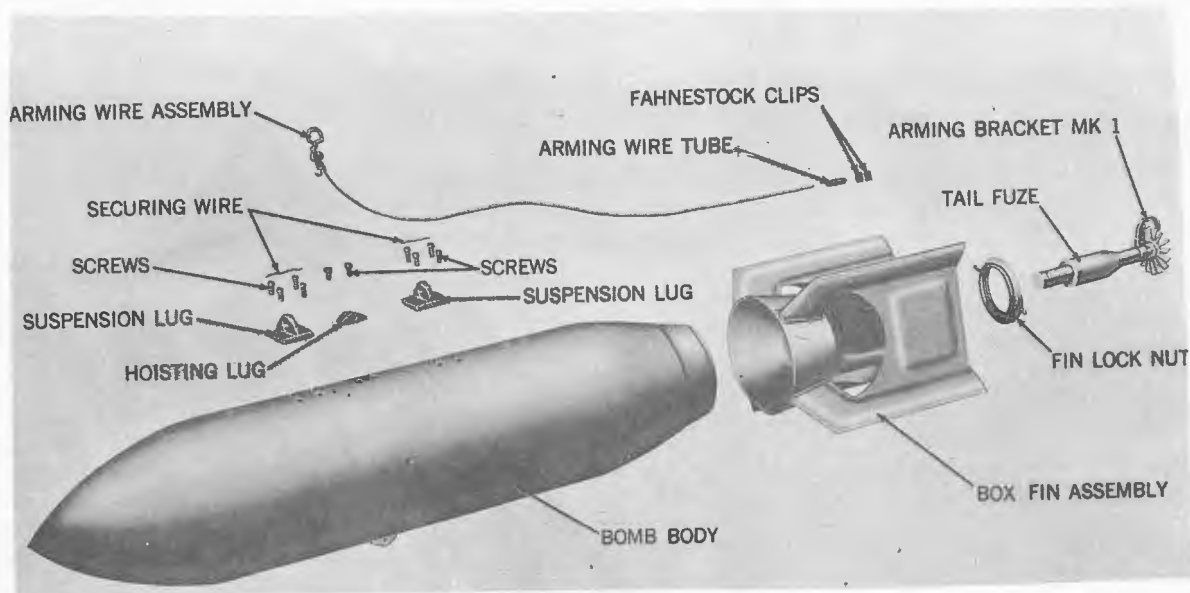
1600-lb AP Bomb AN-Mk 1 Mods 1, 2, & 3, Exploded View.
